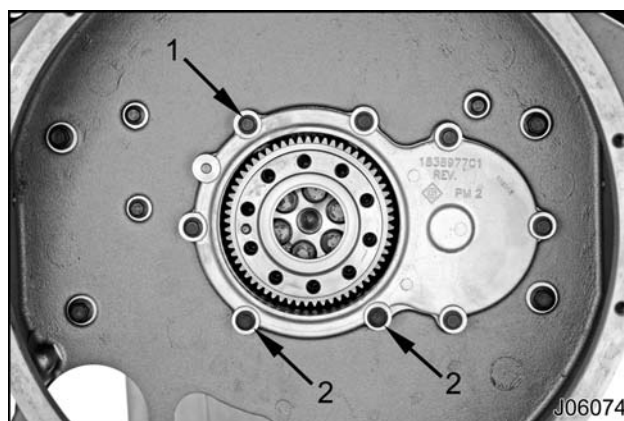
Rear oil seal carrier bolts (stripped chassis)
